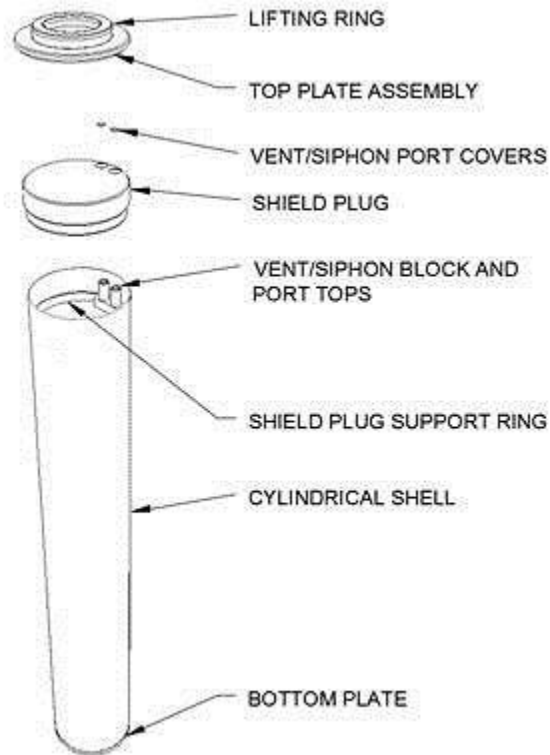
Expanded View of 4P STAD Canister Assembly
